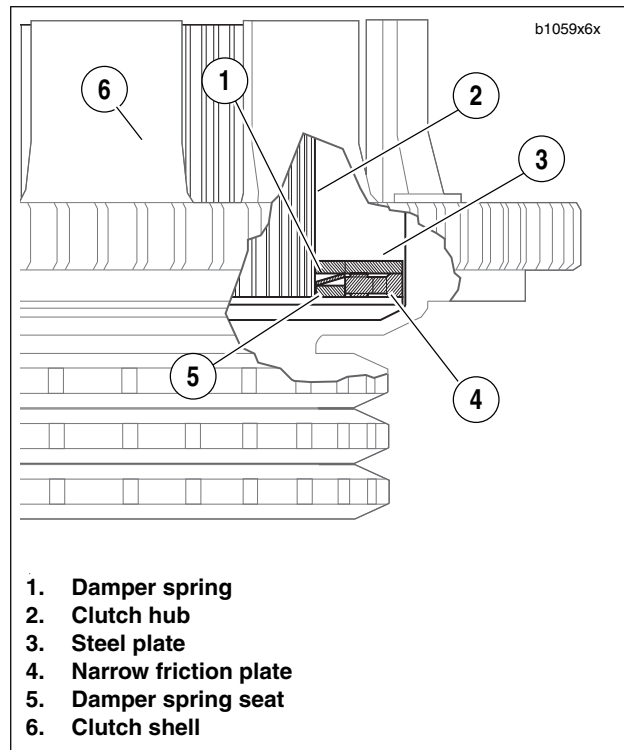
Clutch Pack Stack-Up (Cut-Away View)
